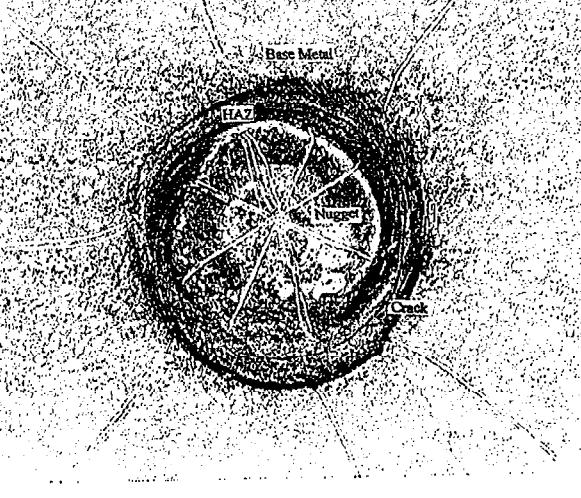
Spot Weld Under Monotonic Rotational Load
